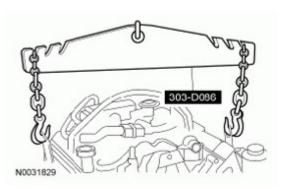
Installing Engine Lifting Bracket Set Courtesy of FORD MOTOR CO.
